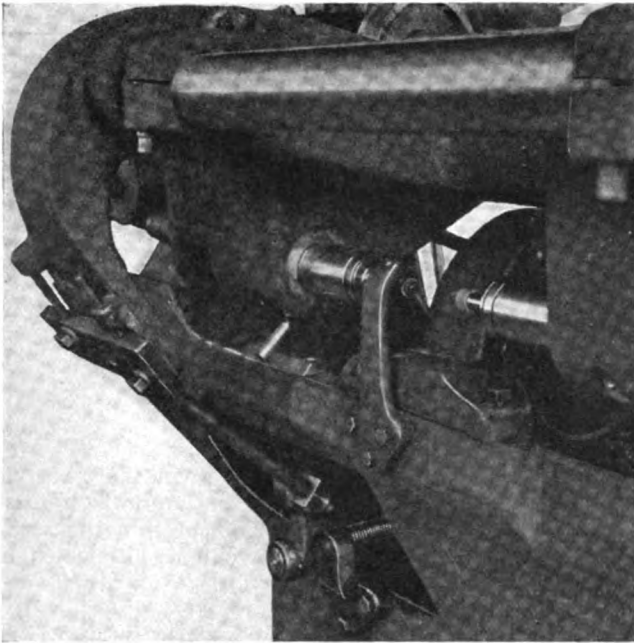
Wheel heads swung back on cross feed extension for dressing wheels
